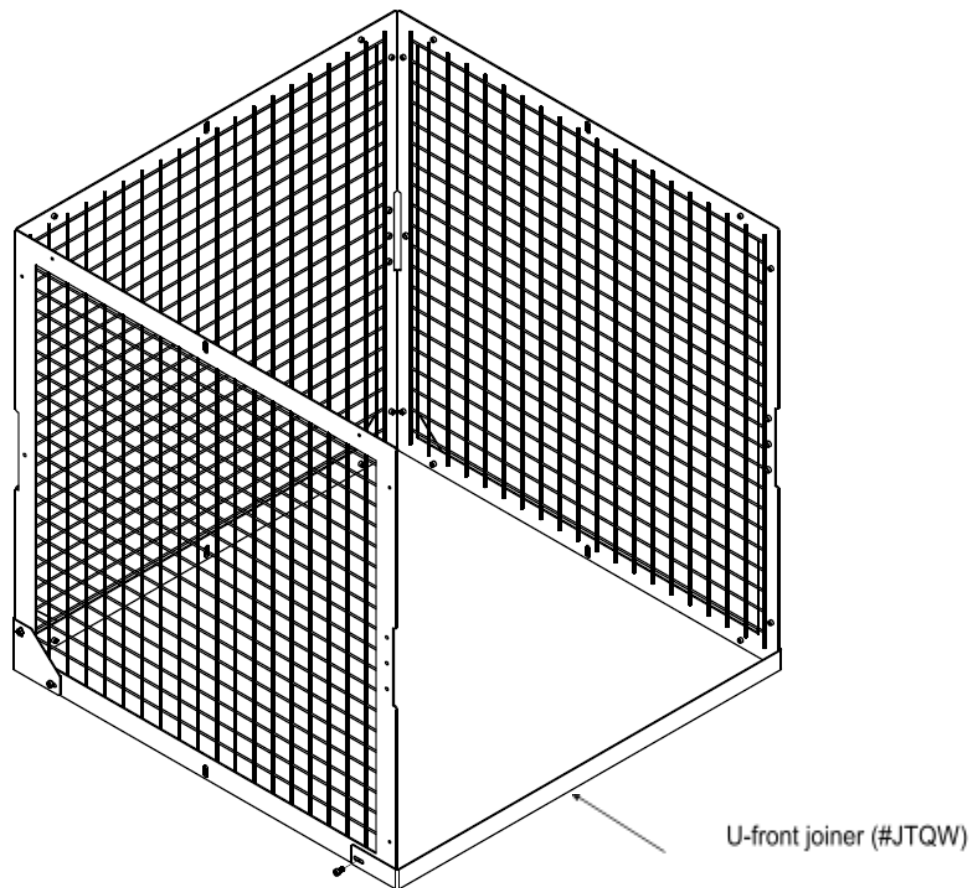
Assemble the U Front Angle and the two sides Frames
